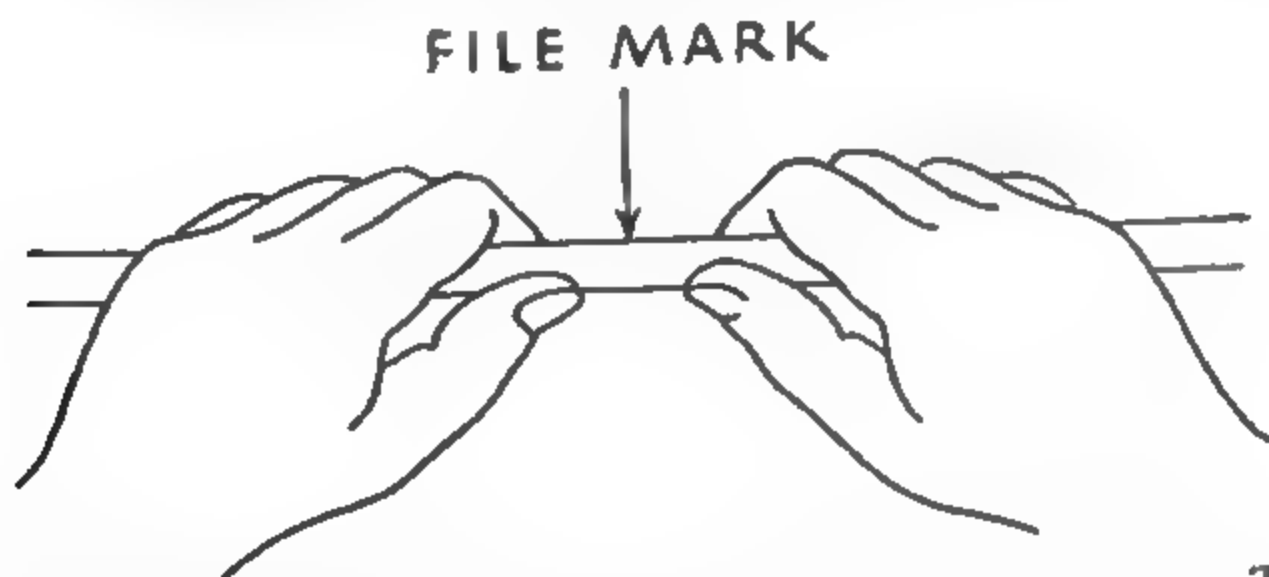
METHOD OF HOLDING THE GLASS IN CUTTING A TUBE
